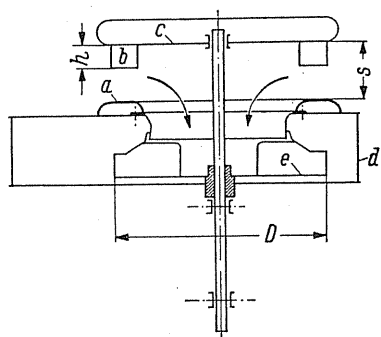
Adjustable inlet guide devices (Regenscheit). *a*, housing; *b*, fixed guide vane; *c*, guide plate; *h*, guide vane depth; *e*, impeller; *s*, free intake width.
